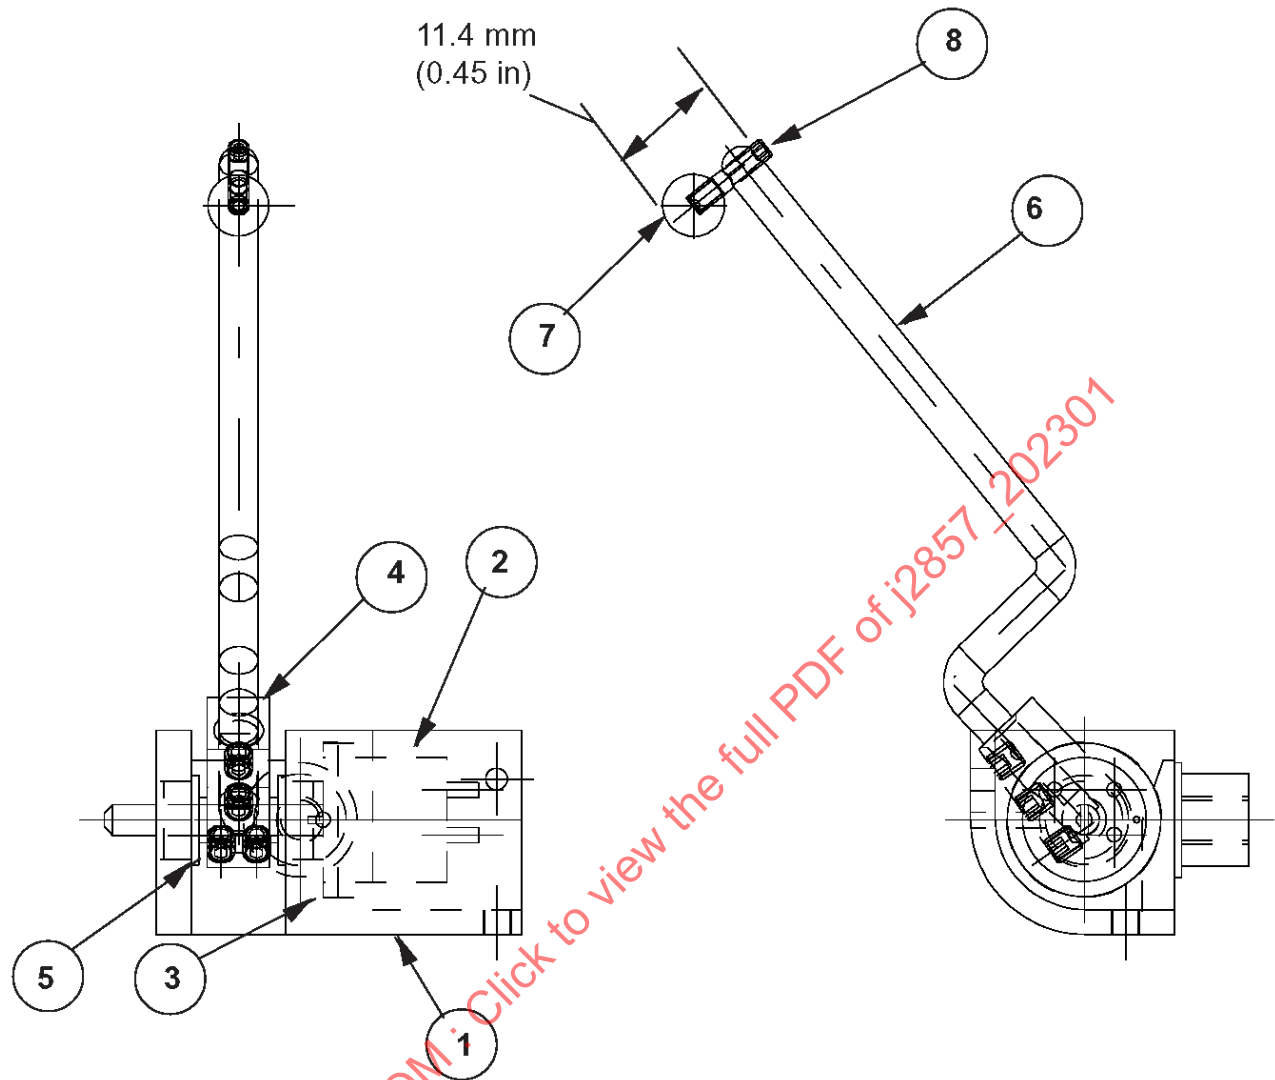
CHEST DEFLECTION ASSEMBLY
